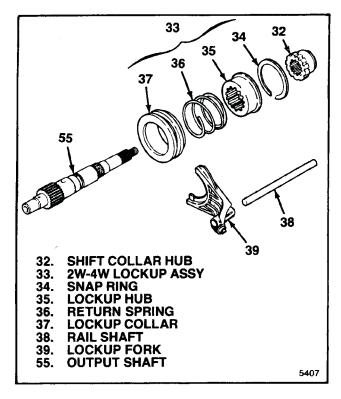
Lockup Shift Parts (Mechanical Shift)
